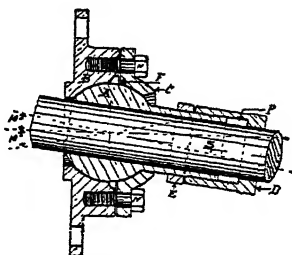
Ball-bearing stuffing-box—sectional view.
